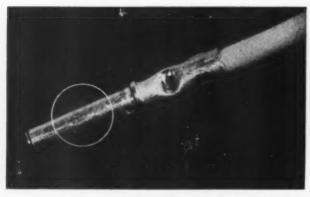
Right—Threaded shells of these connectors accommodate locking rings
